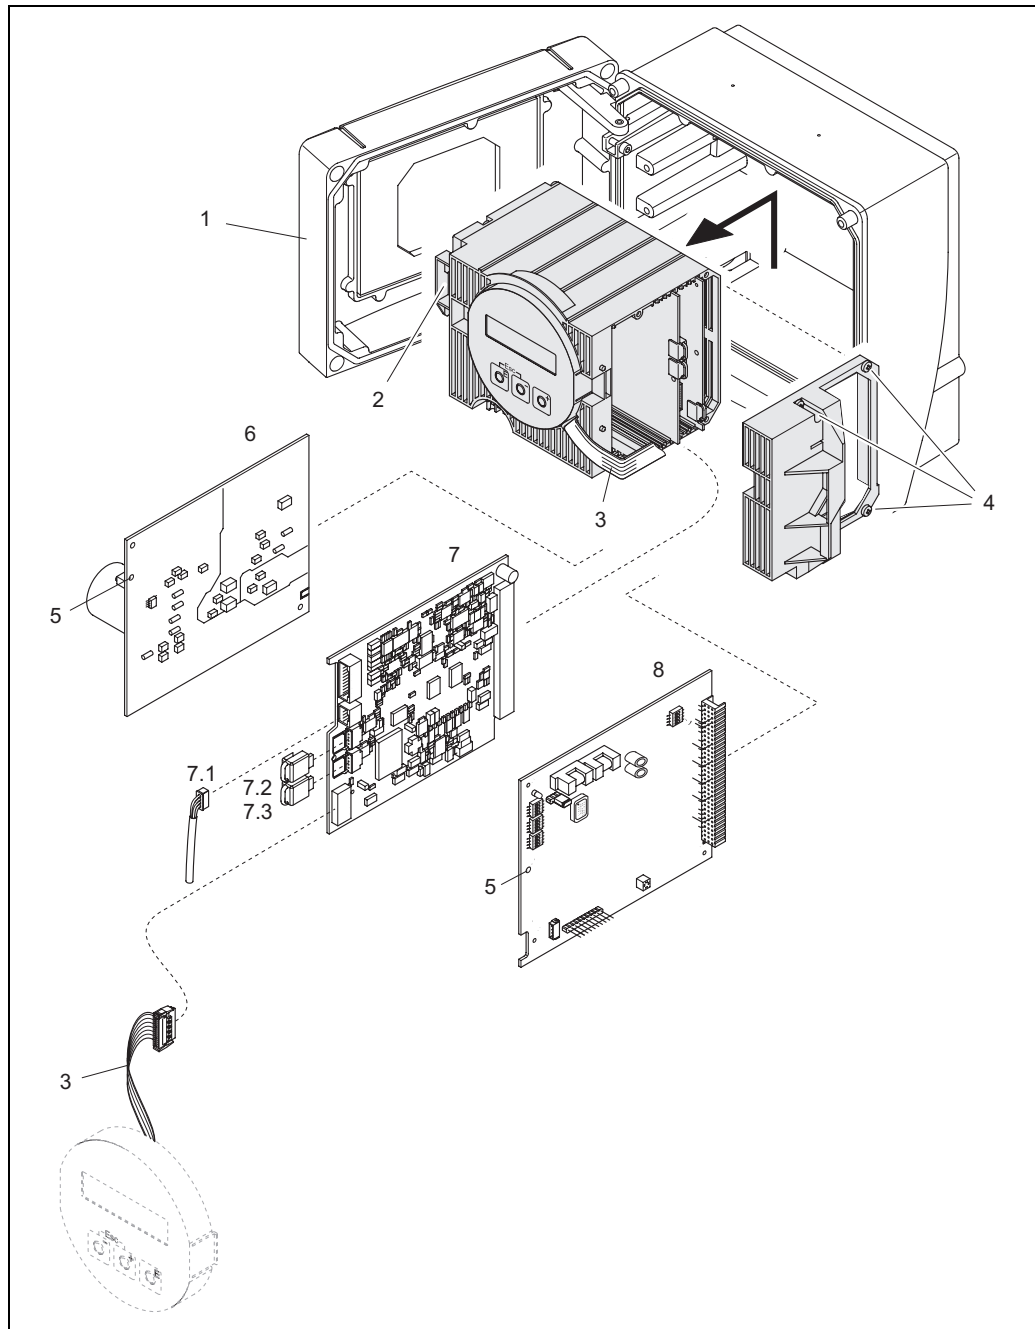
Wall-mount housing: removing and installing printed circuit boards
